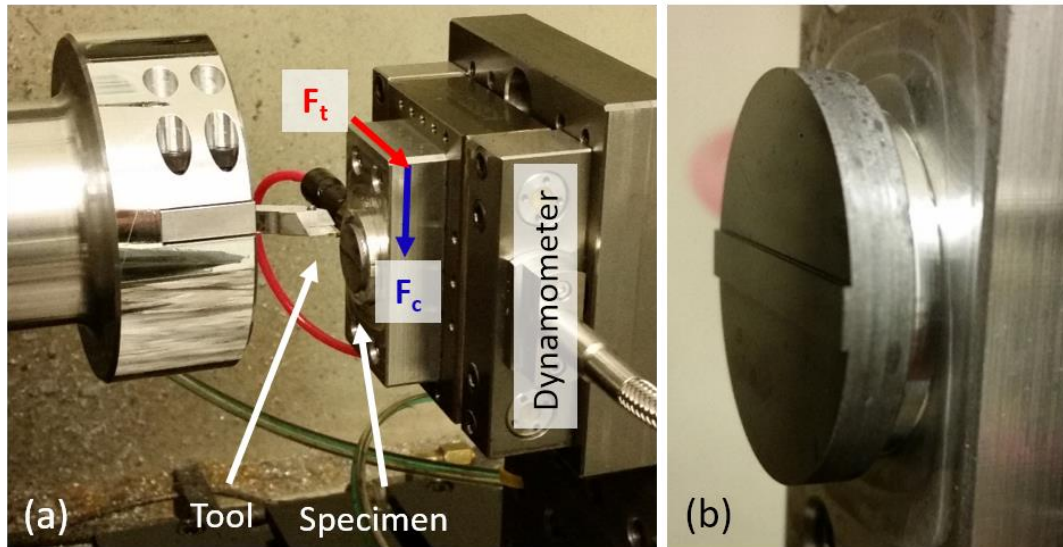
(a) Experimental arrangement for orthogonal flycutting (b) enlarged view of prepared specimen.
